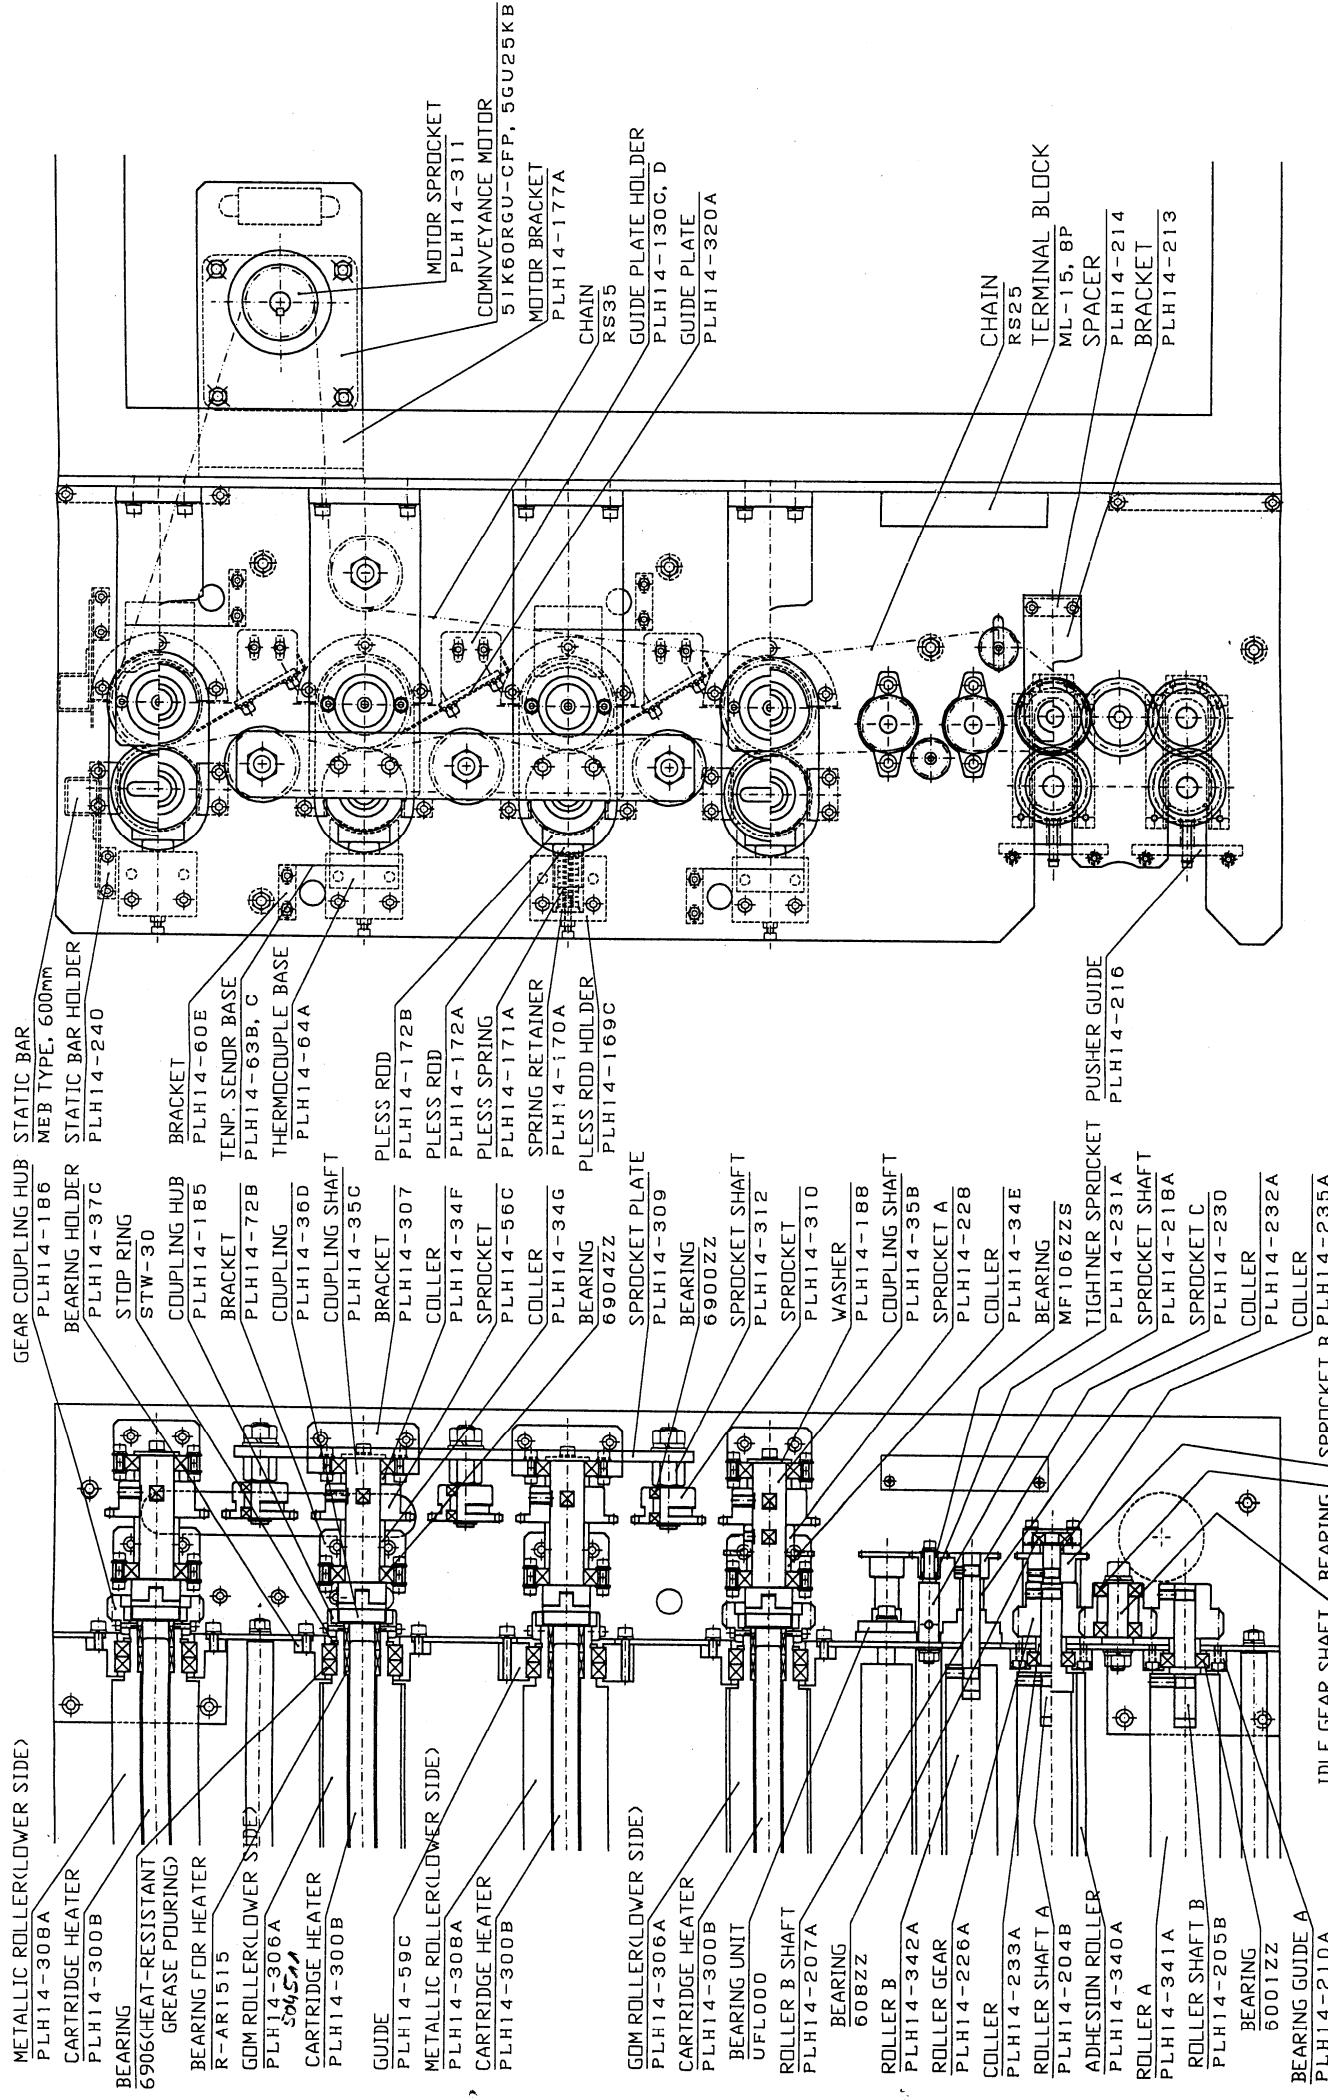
PREHEATING MACHINE RIGHT SIDE VIEW(W(DRIVE SIDE))
